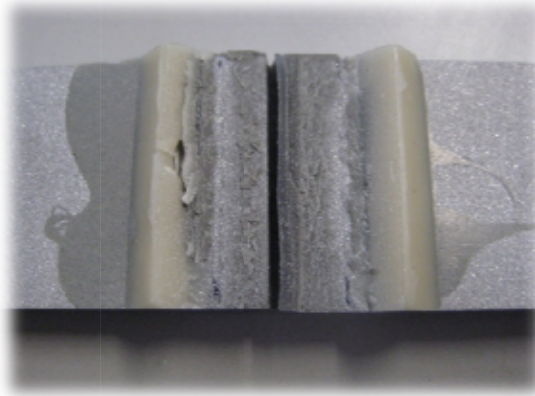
2015+AV138 45 DEGREES TAPER FRACTURE SURFACE
